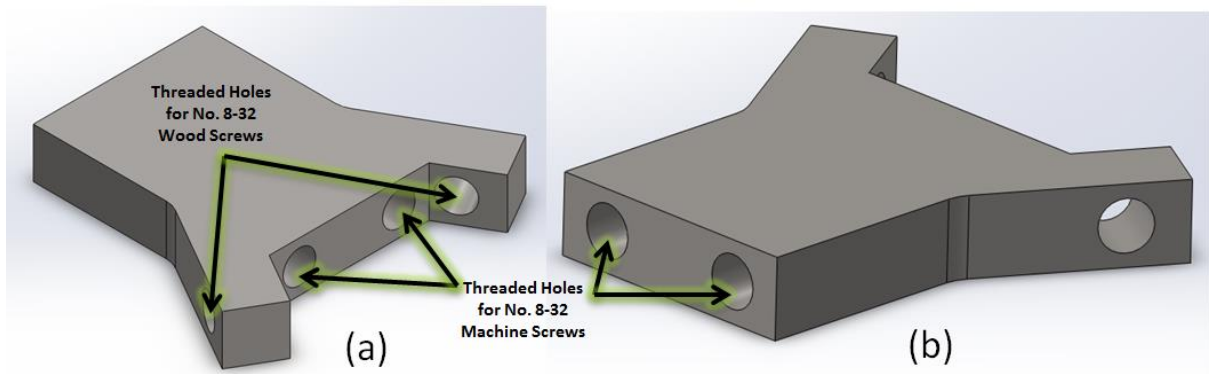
Connection Plate – Part (a) is an isometric view of the connection plate and part (b) is a back side isometric view of the connection plate, both of which have labels for the machine screws which will go through each hole.
